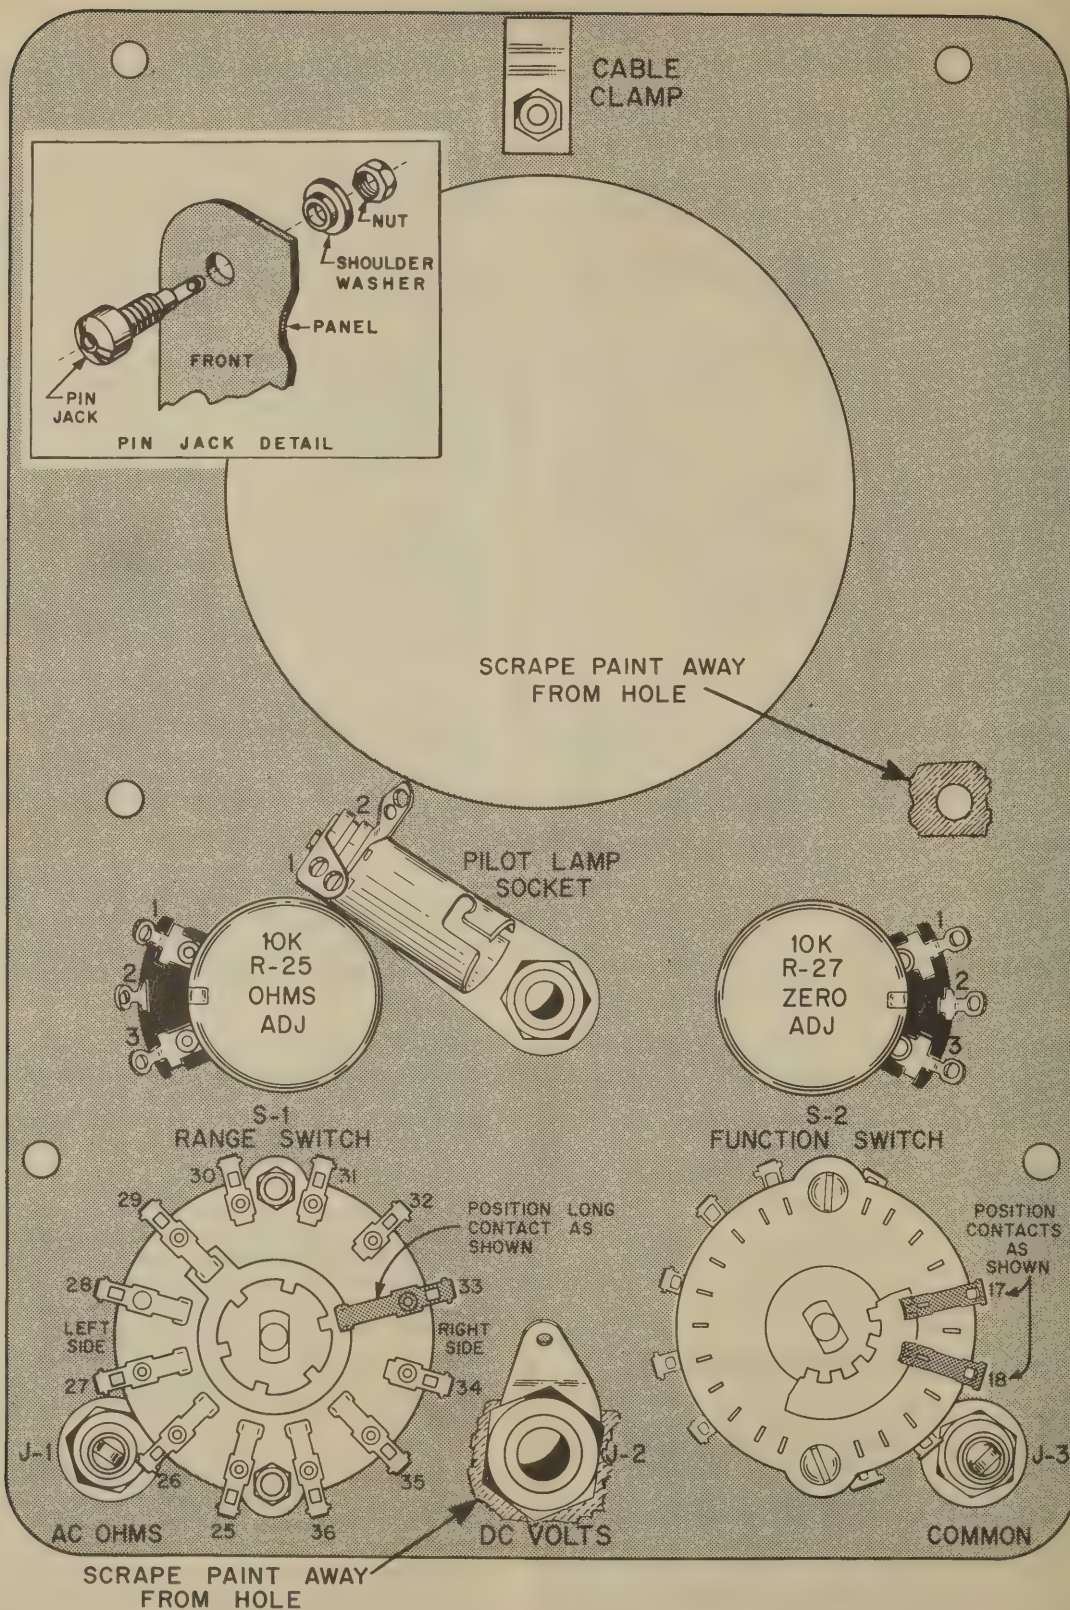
MOUNTING THE PARTS ON THE PANEL
